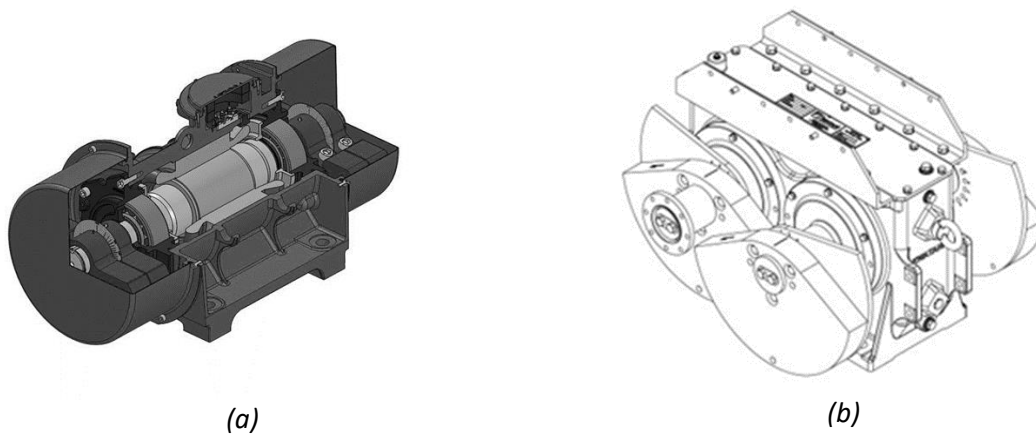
Common exciters a) unbalanced motors and b) gearbox exciter [17]
